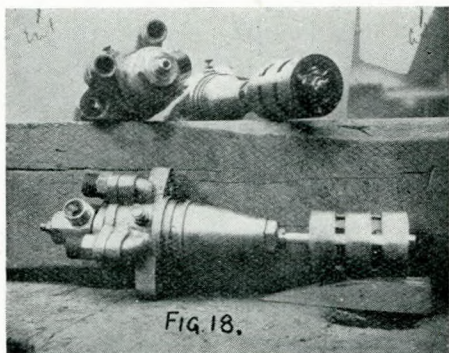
shows the valve and valve operator which is contained within the steam cylinder cover.
